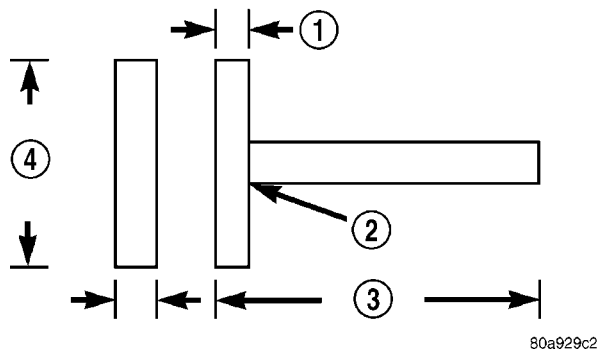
Tool For Cigar Lighter / Power Outlet Removal
